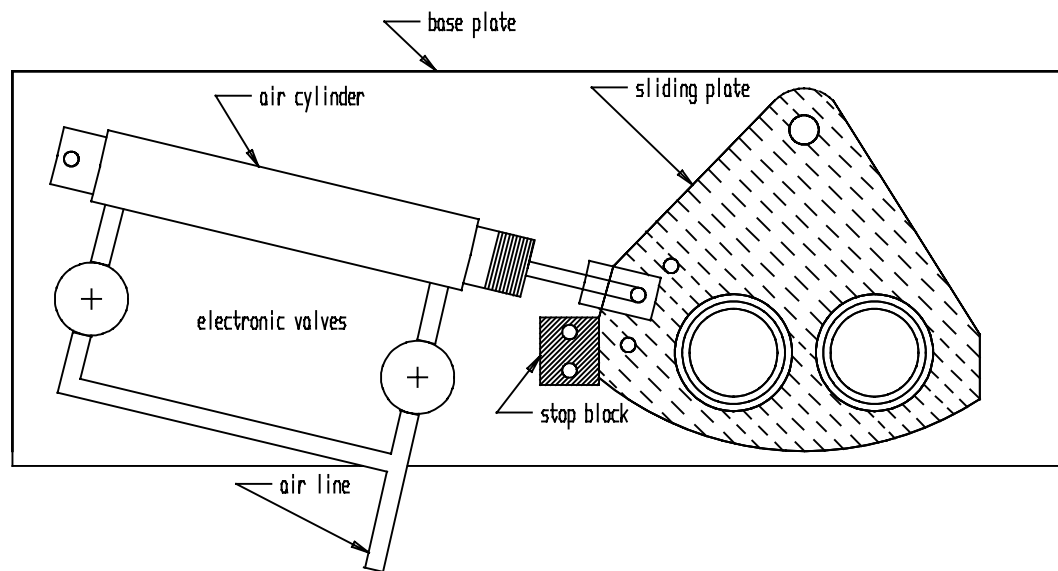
Arrangement of Sliding Valve, Actuator, and Backing Plate
